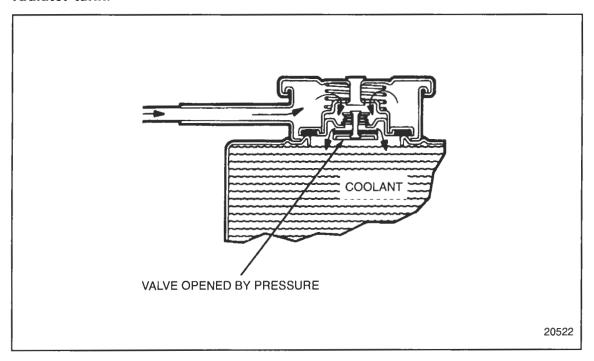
Pressure Control Cap (Vacuum Valve Open)
